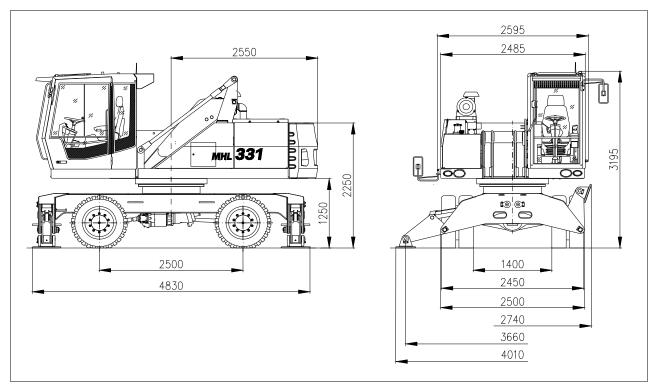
Dimensions (dimensions in mm) with 9.00-20 tires
